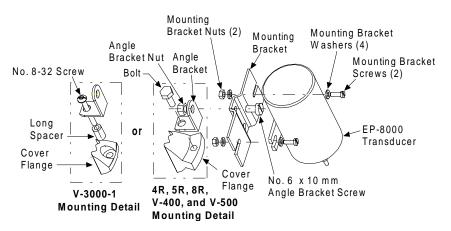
EP-8000-101 Mounting Kit for Installation of the EP-8000 to a 4R, 5R, 8R, V-400, V-500, or V-3000-1 Valve Actuator with or without a V-9502 Positioner
